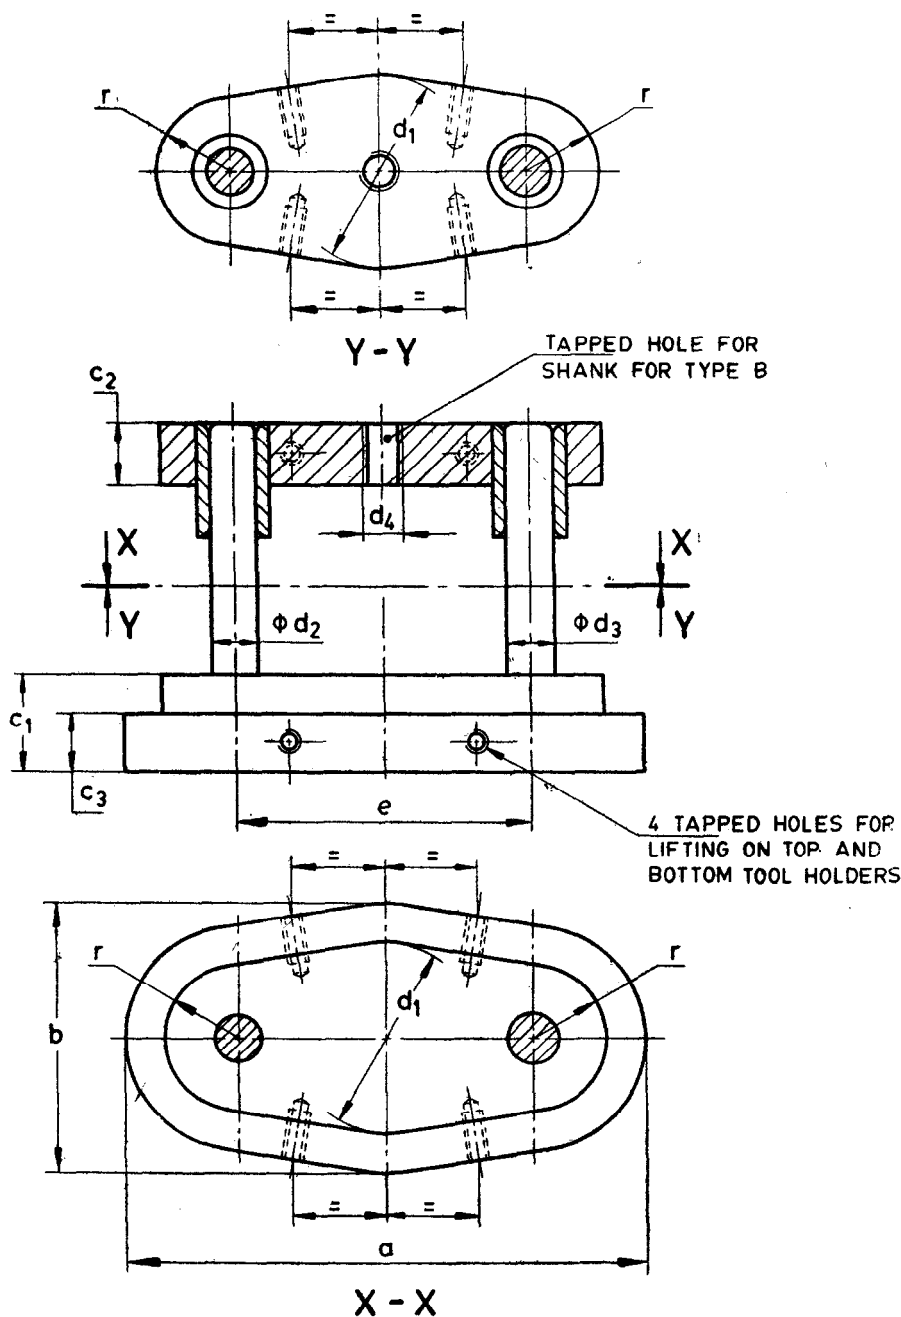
DIMENSIONS FOR CENTRE POST ROUND DIE SET
